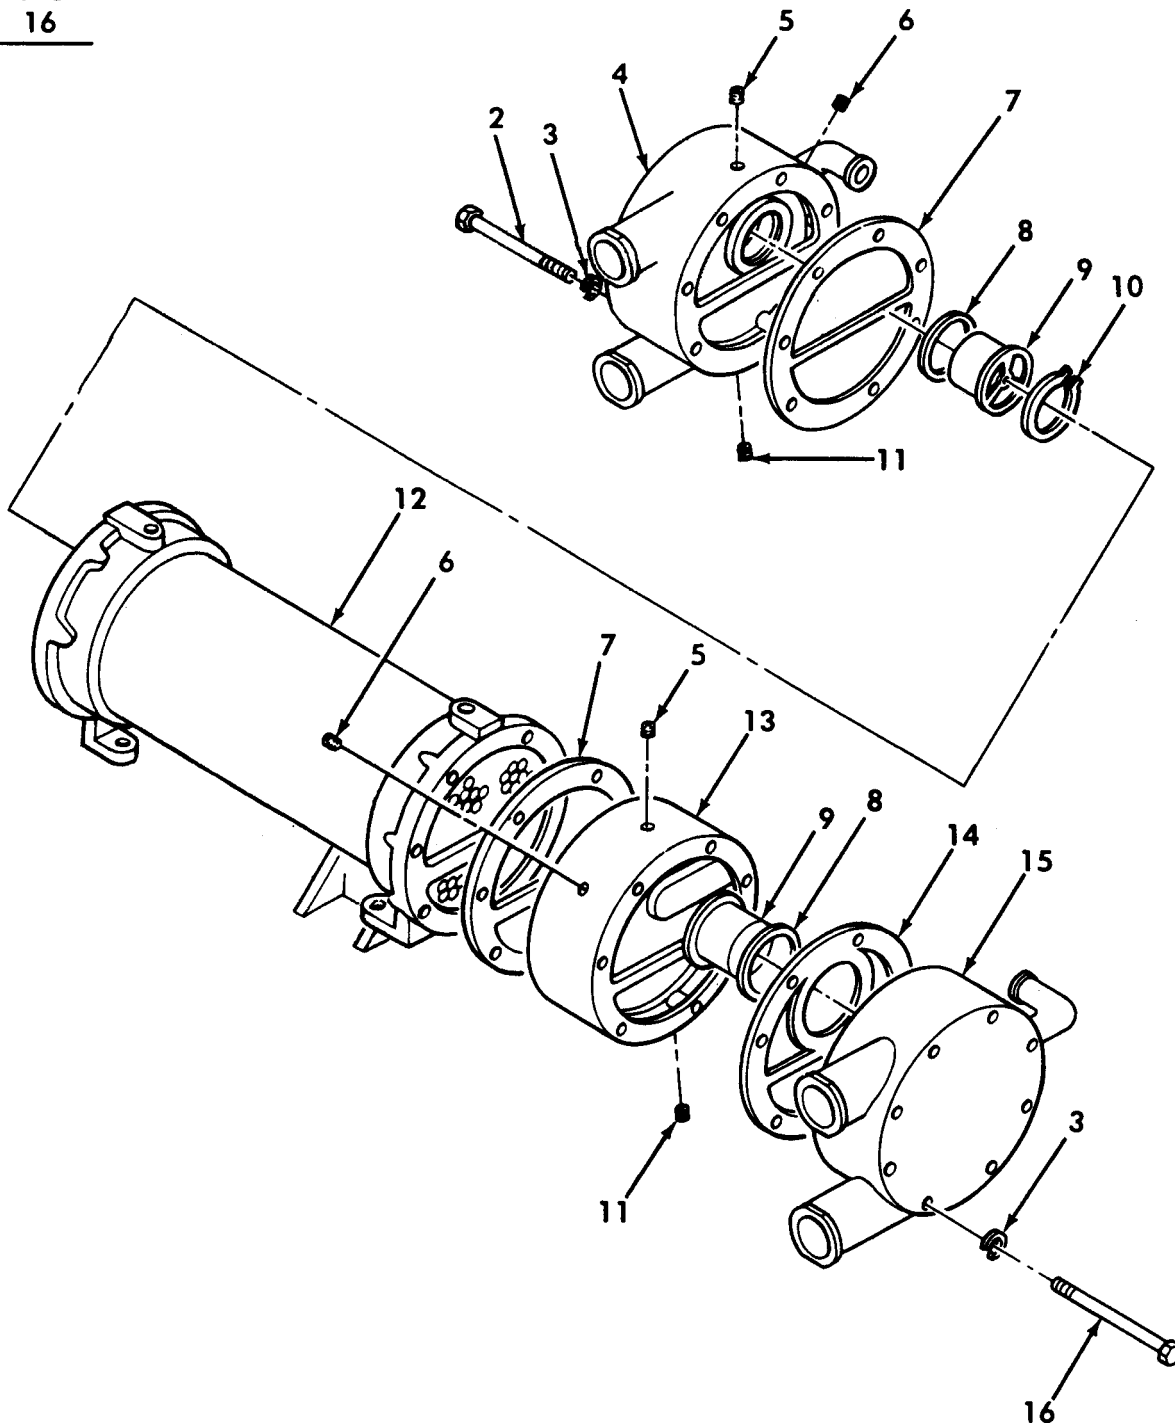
Transmission Oil Cooler with Engine Coolant Thermostats.
